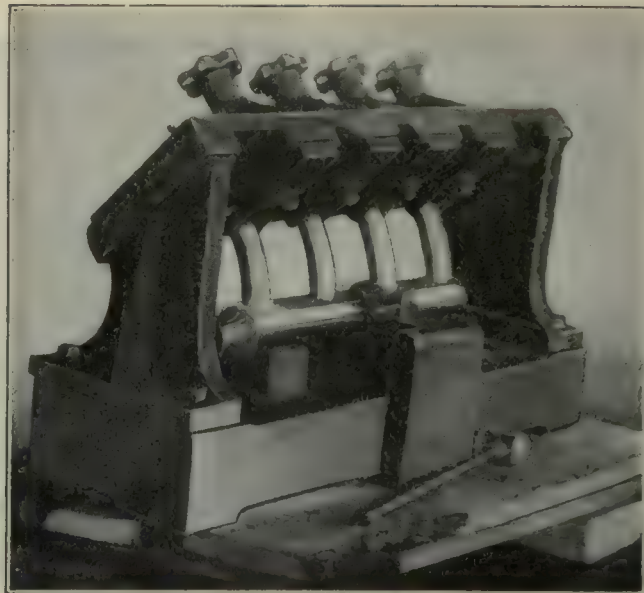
MOTORCYCLE MANIFOLD WELDING JIG
